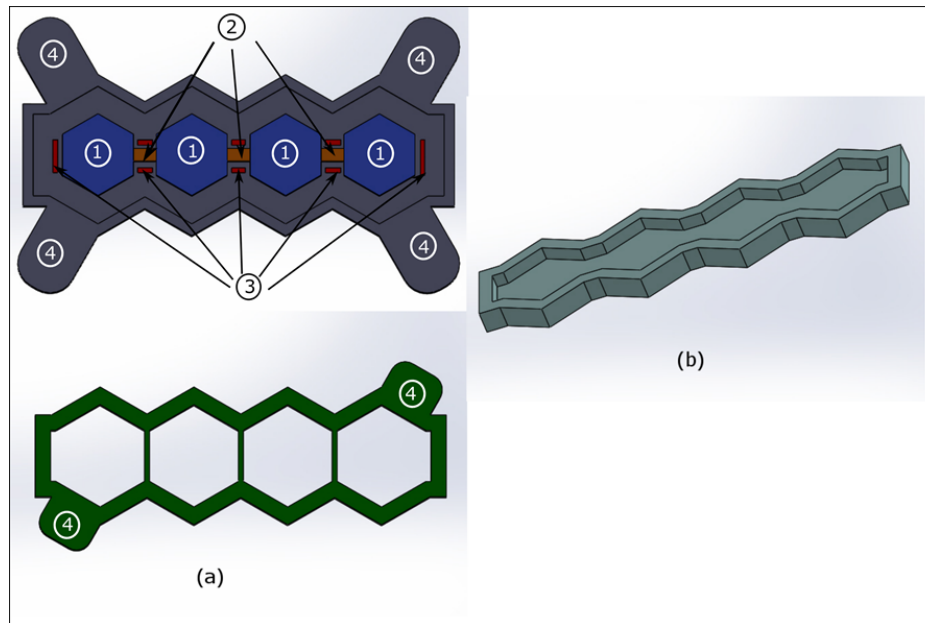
3D printed moulds used to craft the mini-bladder unit (a) two-part mould to craft the top layer of the mini-bladder (b) base mould used to craft the bottom layer. The special features of the moulds used to craft mini-bladders; (1) hexagonal air chamber (positive) feature (2) central air channel (positive feature) (3) negative square feature (4) protruding curved segments at the edge of the moulds.
